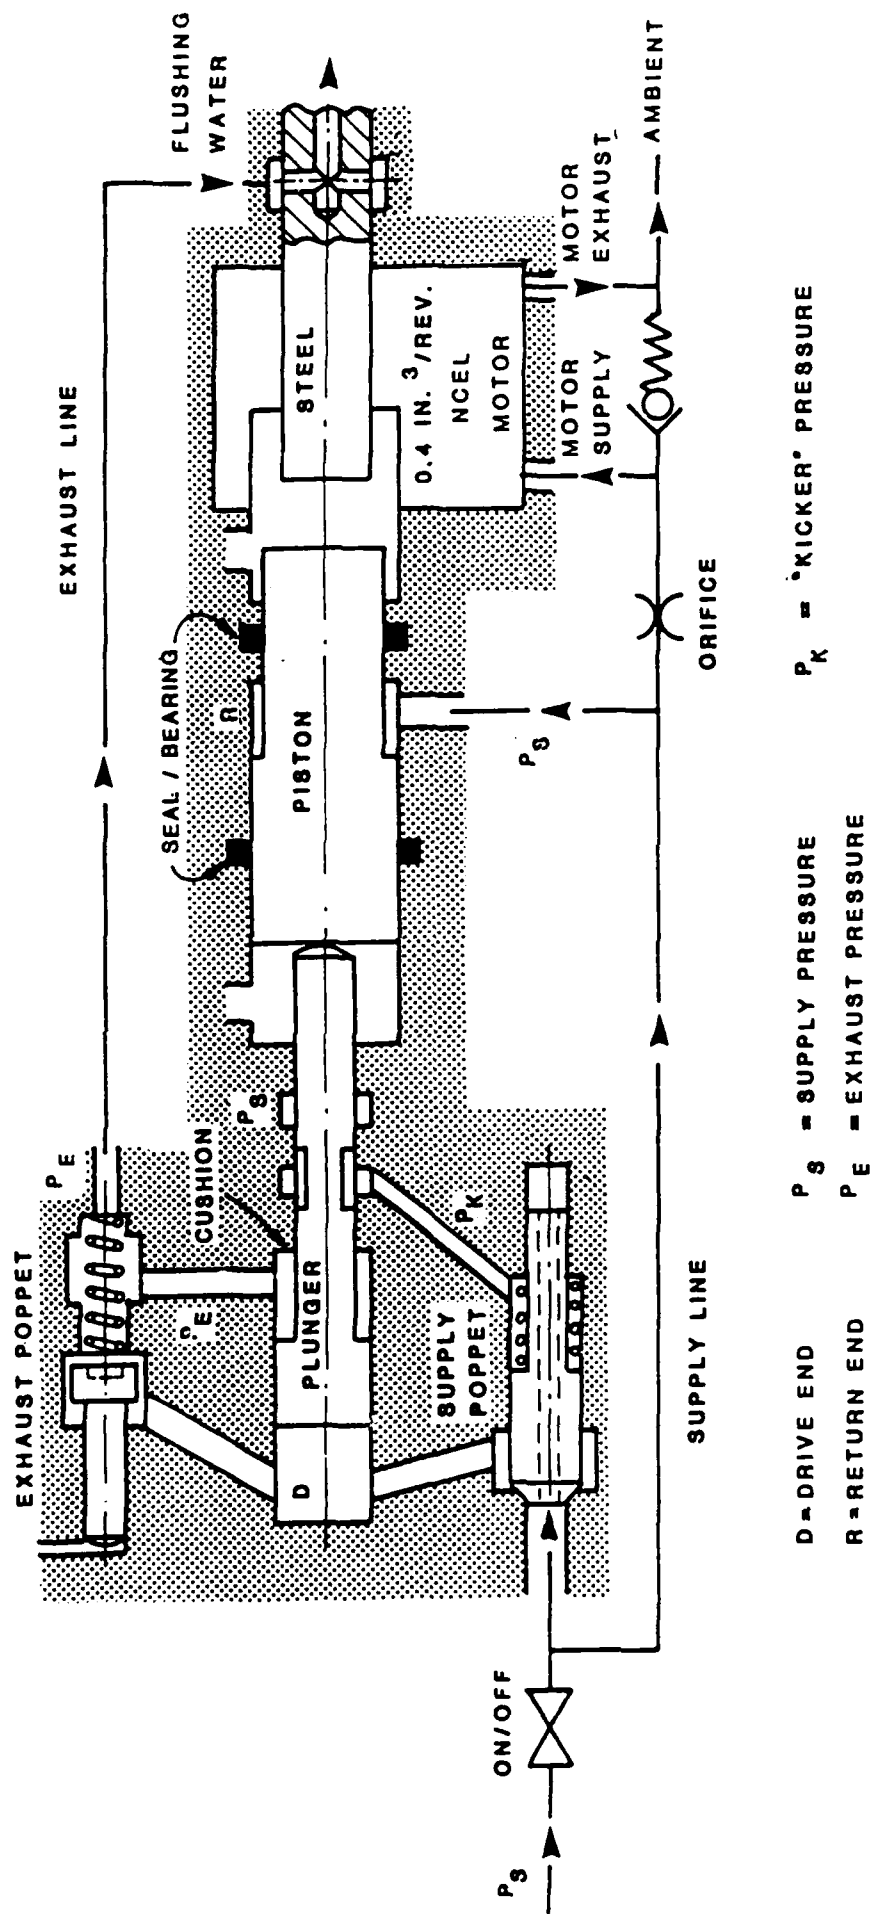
ADM rock drill with a double poppet-kicker port hydromechanical linear impact mechanism.
